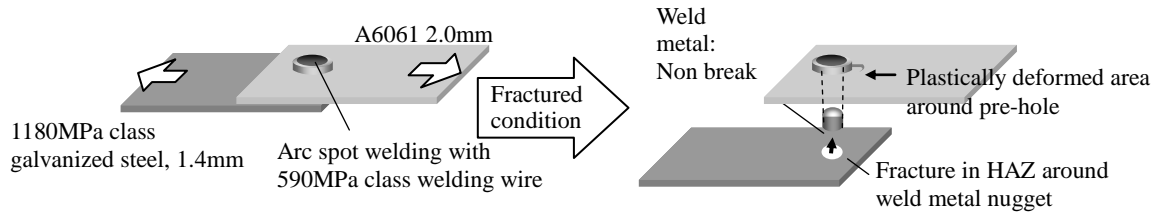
Typical schematic fracture pattern of EASW joint in tensile shear test
